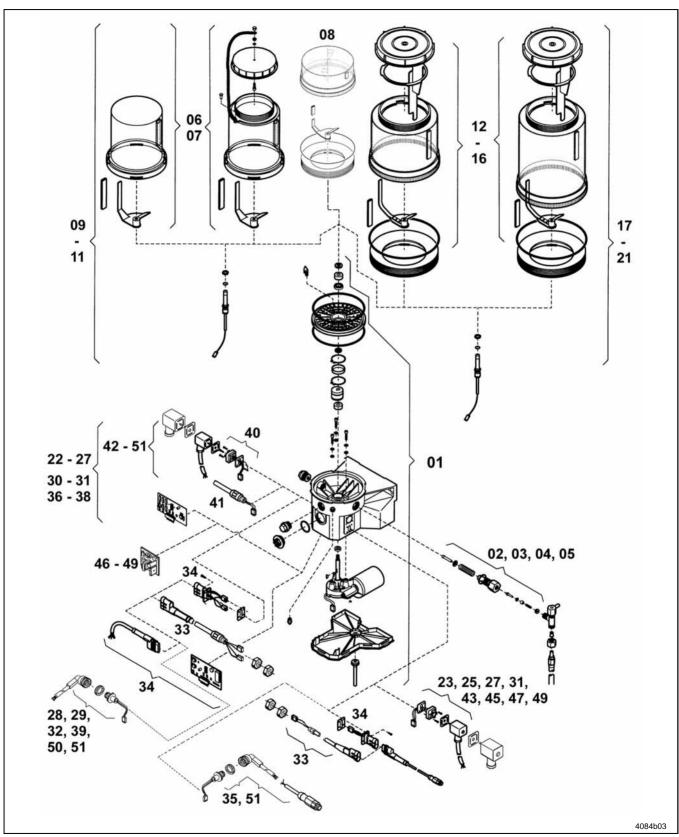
Assemblies for pump model 203, filling from top and bottom
